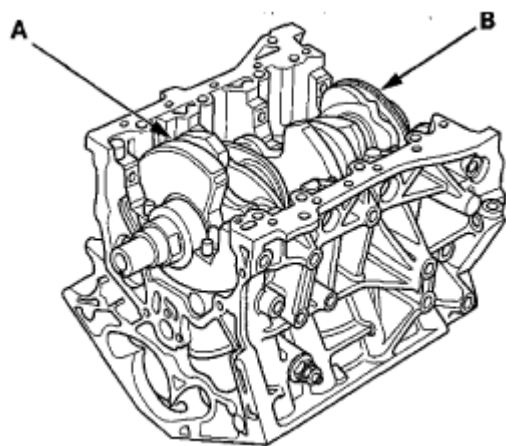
Identifying Crankshaft And CKP Pulse Plate
